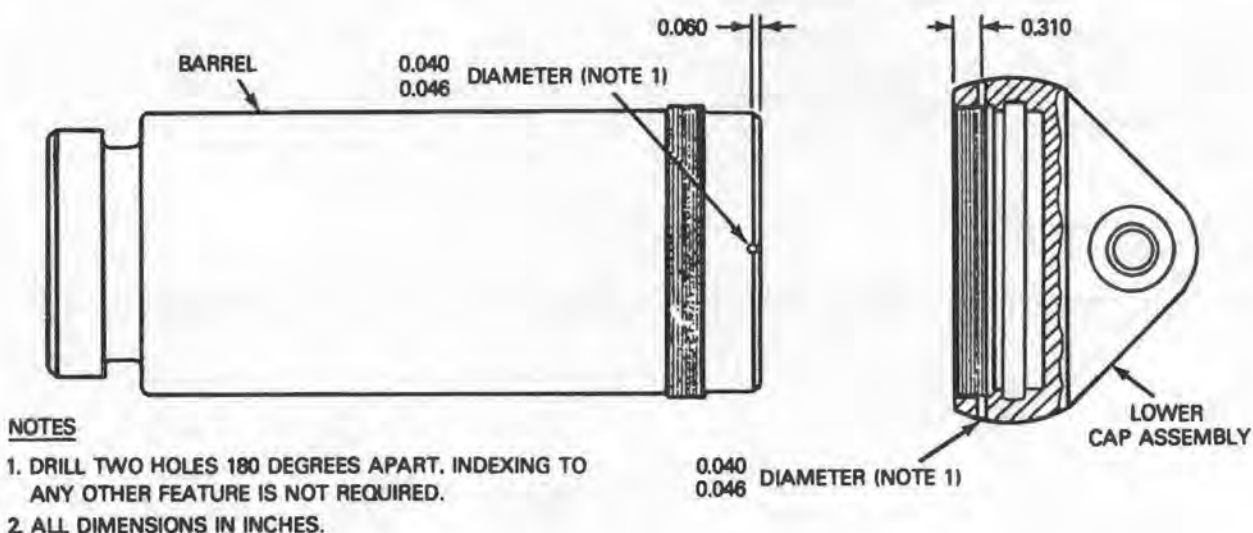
D. Minor Repair - Barrel and Lower Cap Assembly
